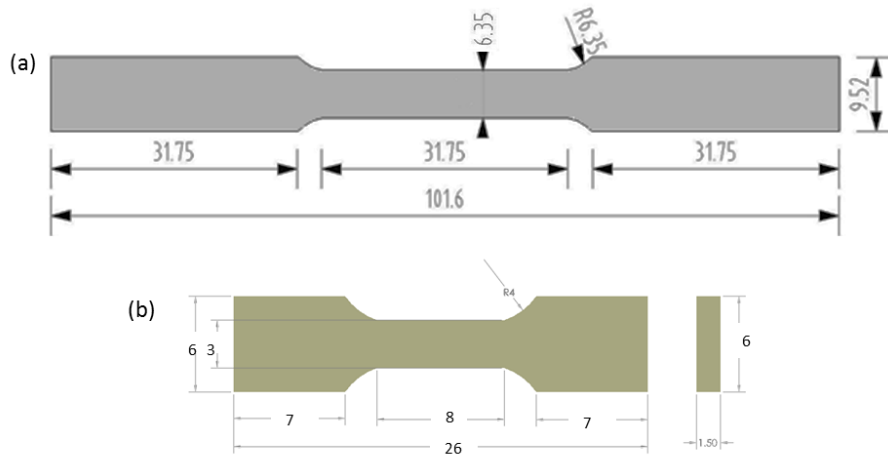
Schematic diagram of a tensile specimen; a) ASTM E8 sub size specimen, b) Nonstandard size specimen.
